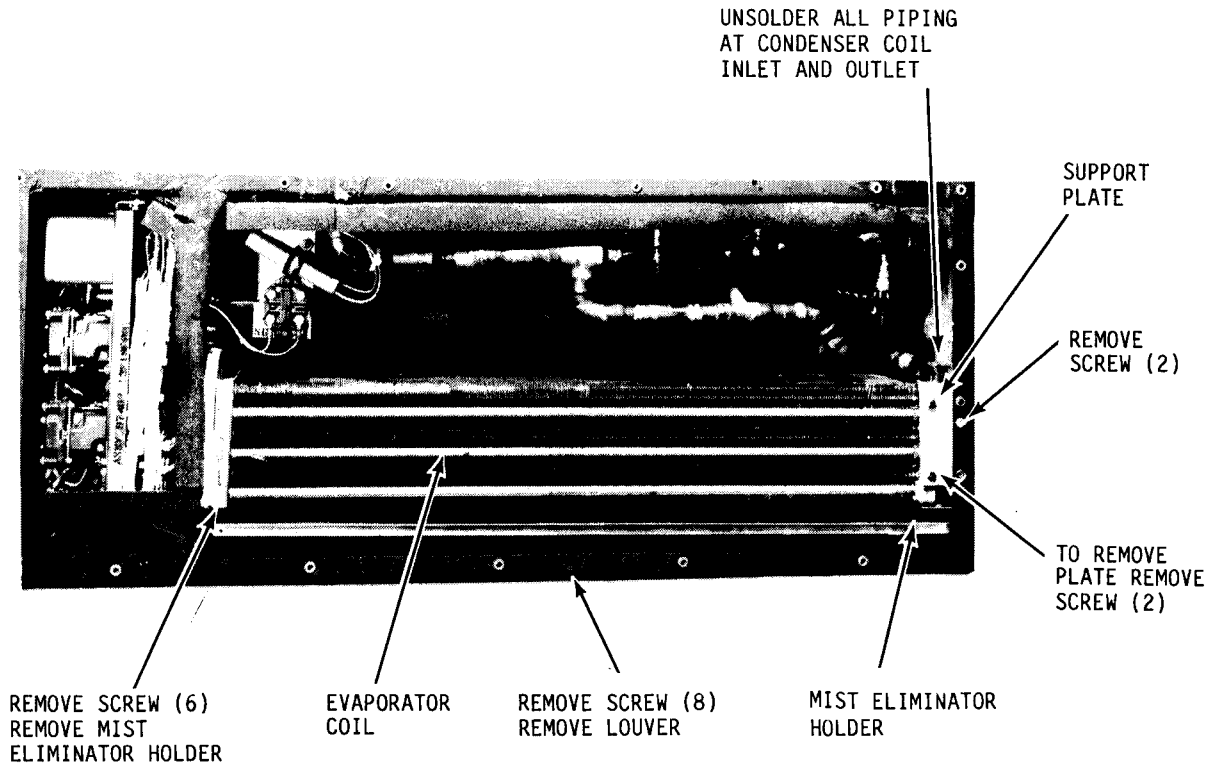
Evaporator coil and mist eliminator holder, removal and installation
